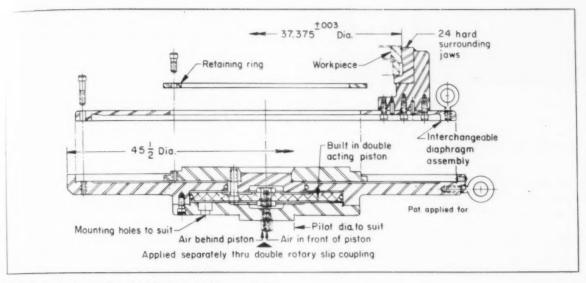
By means of a double rotary slip coupling, this chuck can be used for both internal and external chucking. The above exploded view of the 45½-inch diameter fixture indicates that the diaphragm is a separate interchangeable unit.
